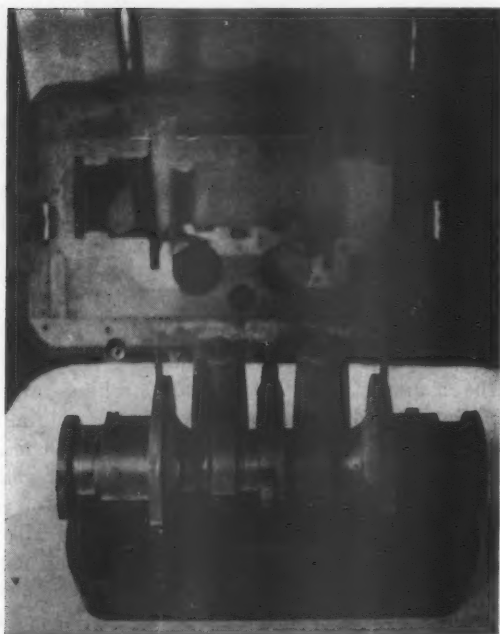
STRIPPER TYPE EQUIPMENT. COPE AND DRAG CAST SEPARATELY MOUNTED ON STOOLS. STRIPPER EQUIPPED WITH SHIFT BLOCKS TO OVERCOME SHIFTS. PATTERN OUTLINE IN FRAME LINED WITH BRASS STRIPS TO COMPENSATE FOR WEAR OF STRIPPING FRAME. THIS TYPE OF EQUIPMENT WAS MOSTLY USED FOR HUBS AND CARRIERS.
